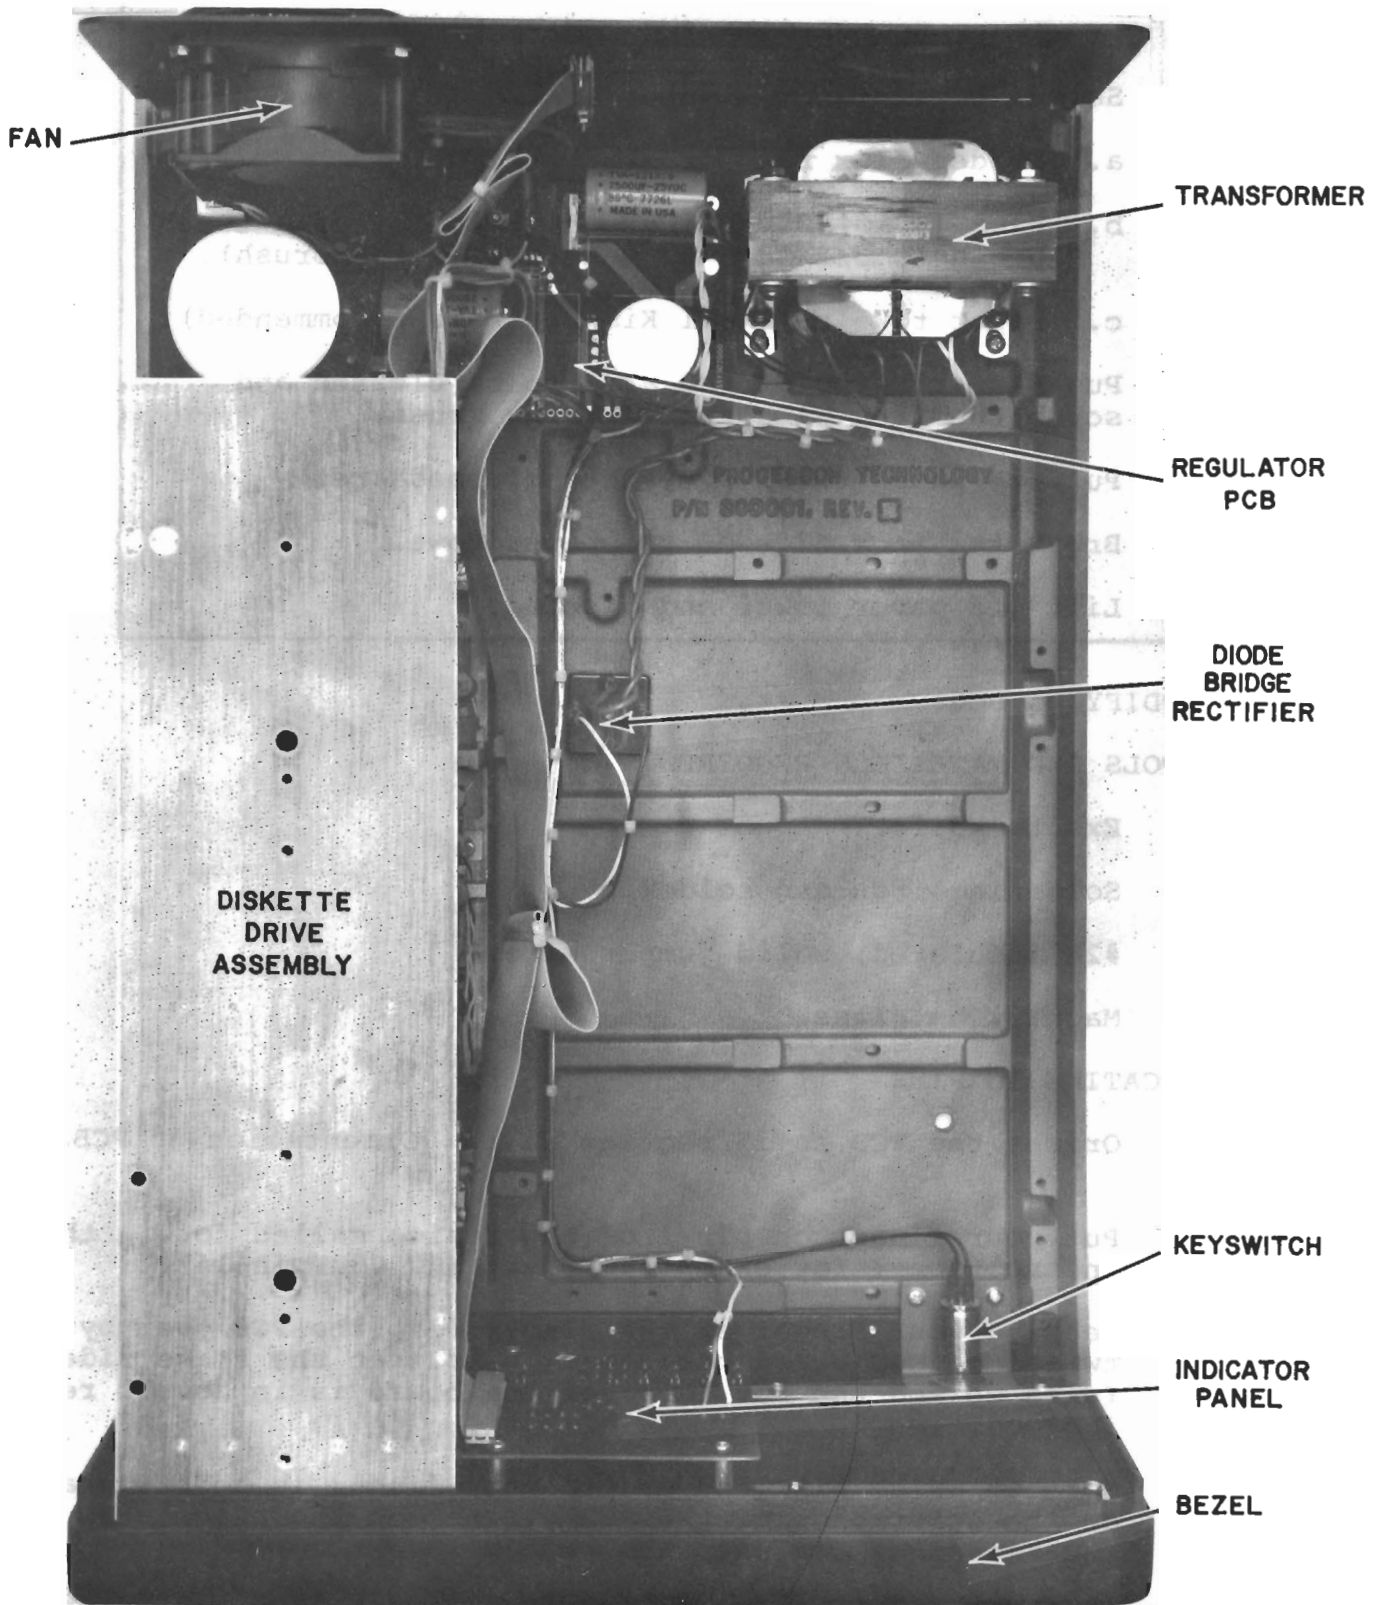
Helios II Diskette Drive Cabinet, Inside Top View
